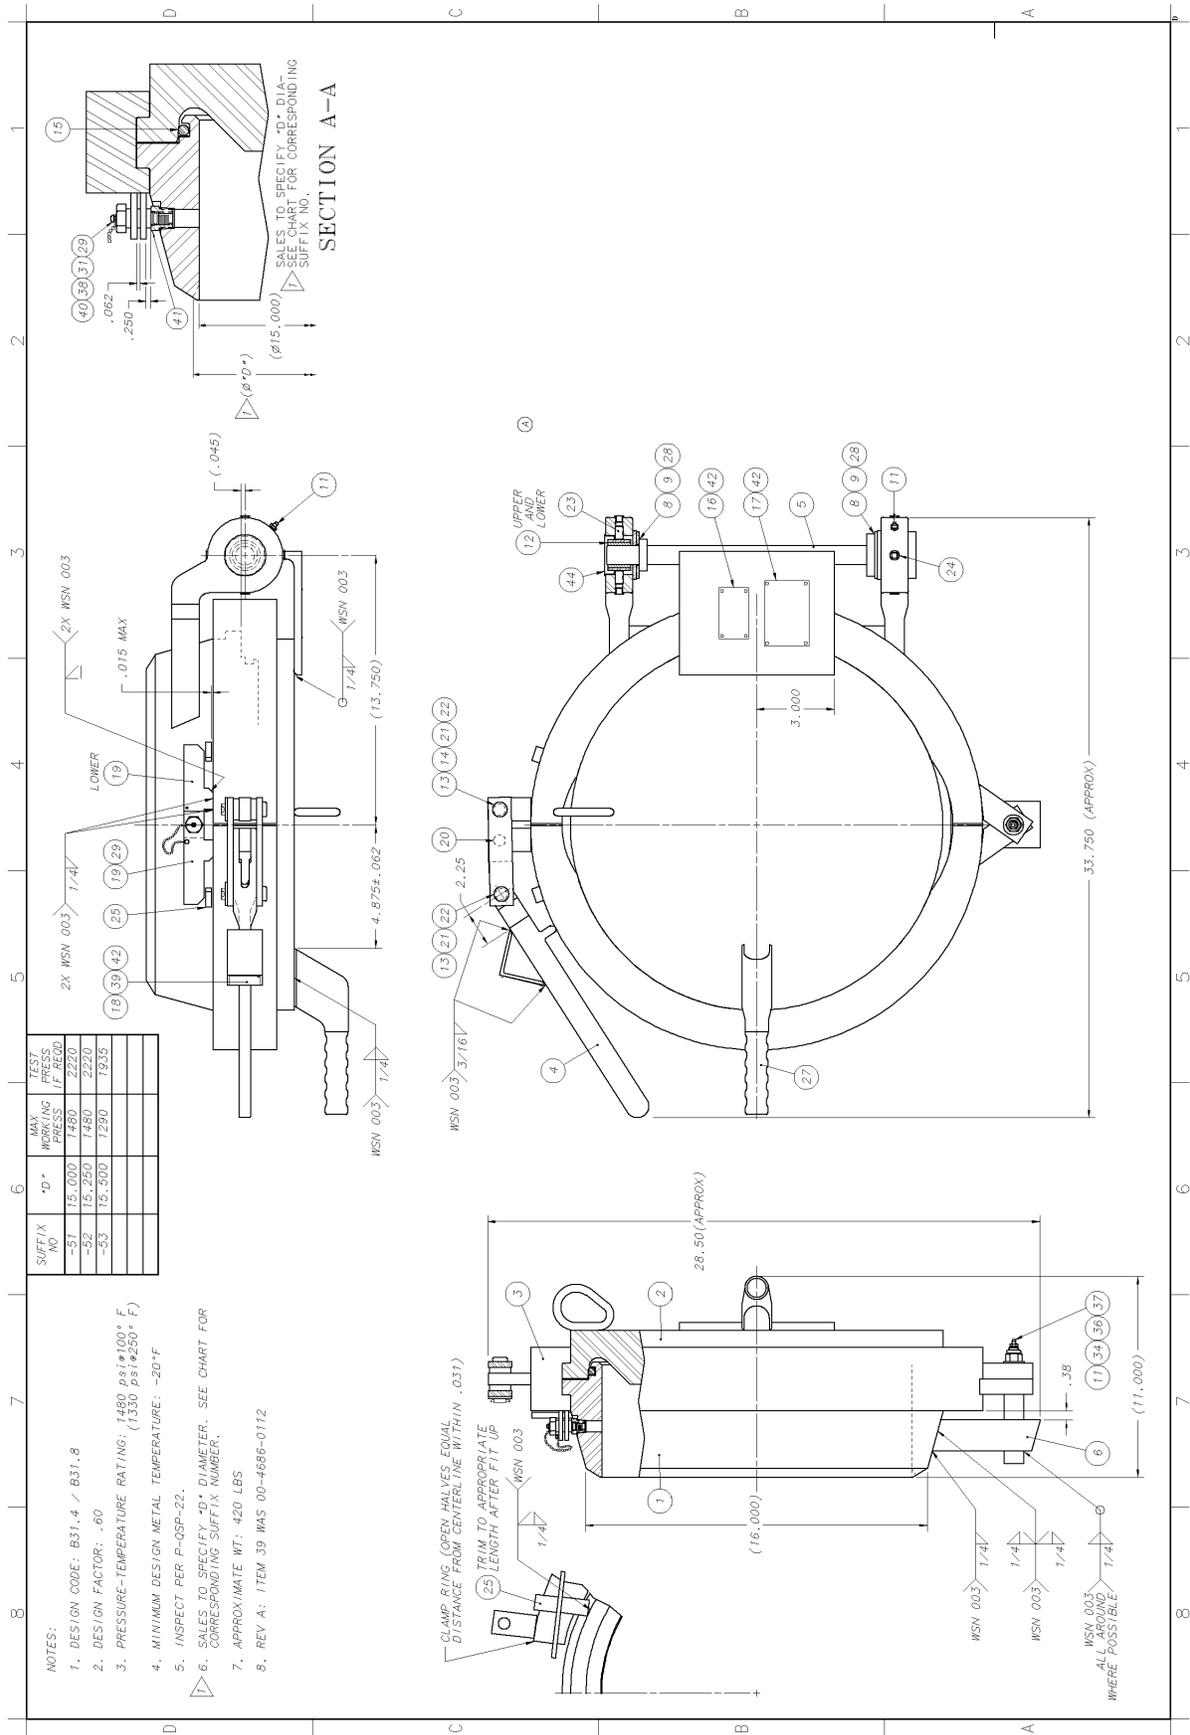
D-2000 Clamp Ring Closure, 16'-30"
